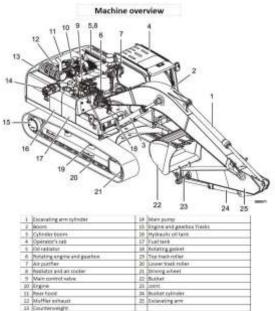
Hydraulic Excavator with details of some components. Adapted from [4]
